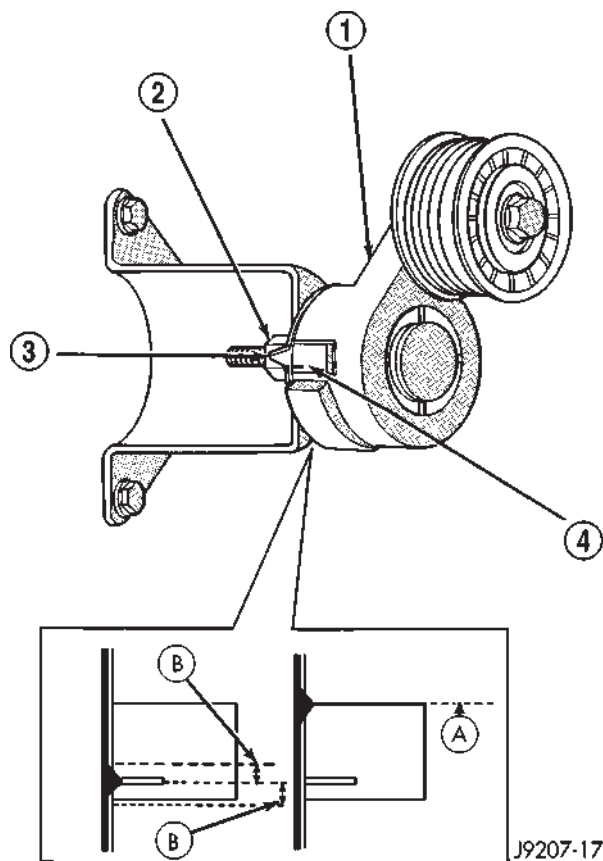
Tensioner Indexing Marks and Mounting Nut
